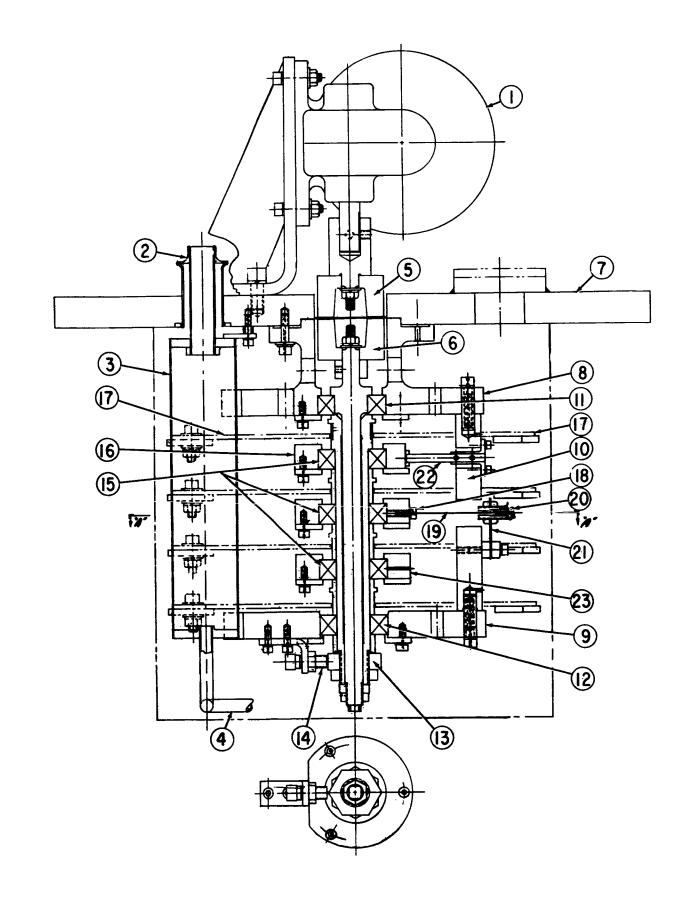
Schematic of Ball-Bearing Test Rig Used for Vacuum Tests
